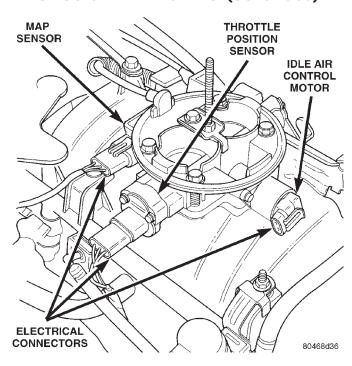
Sensor and IAC Motor Location—5.2L Engine
